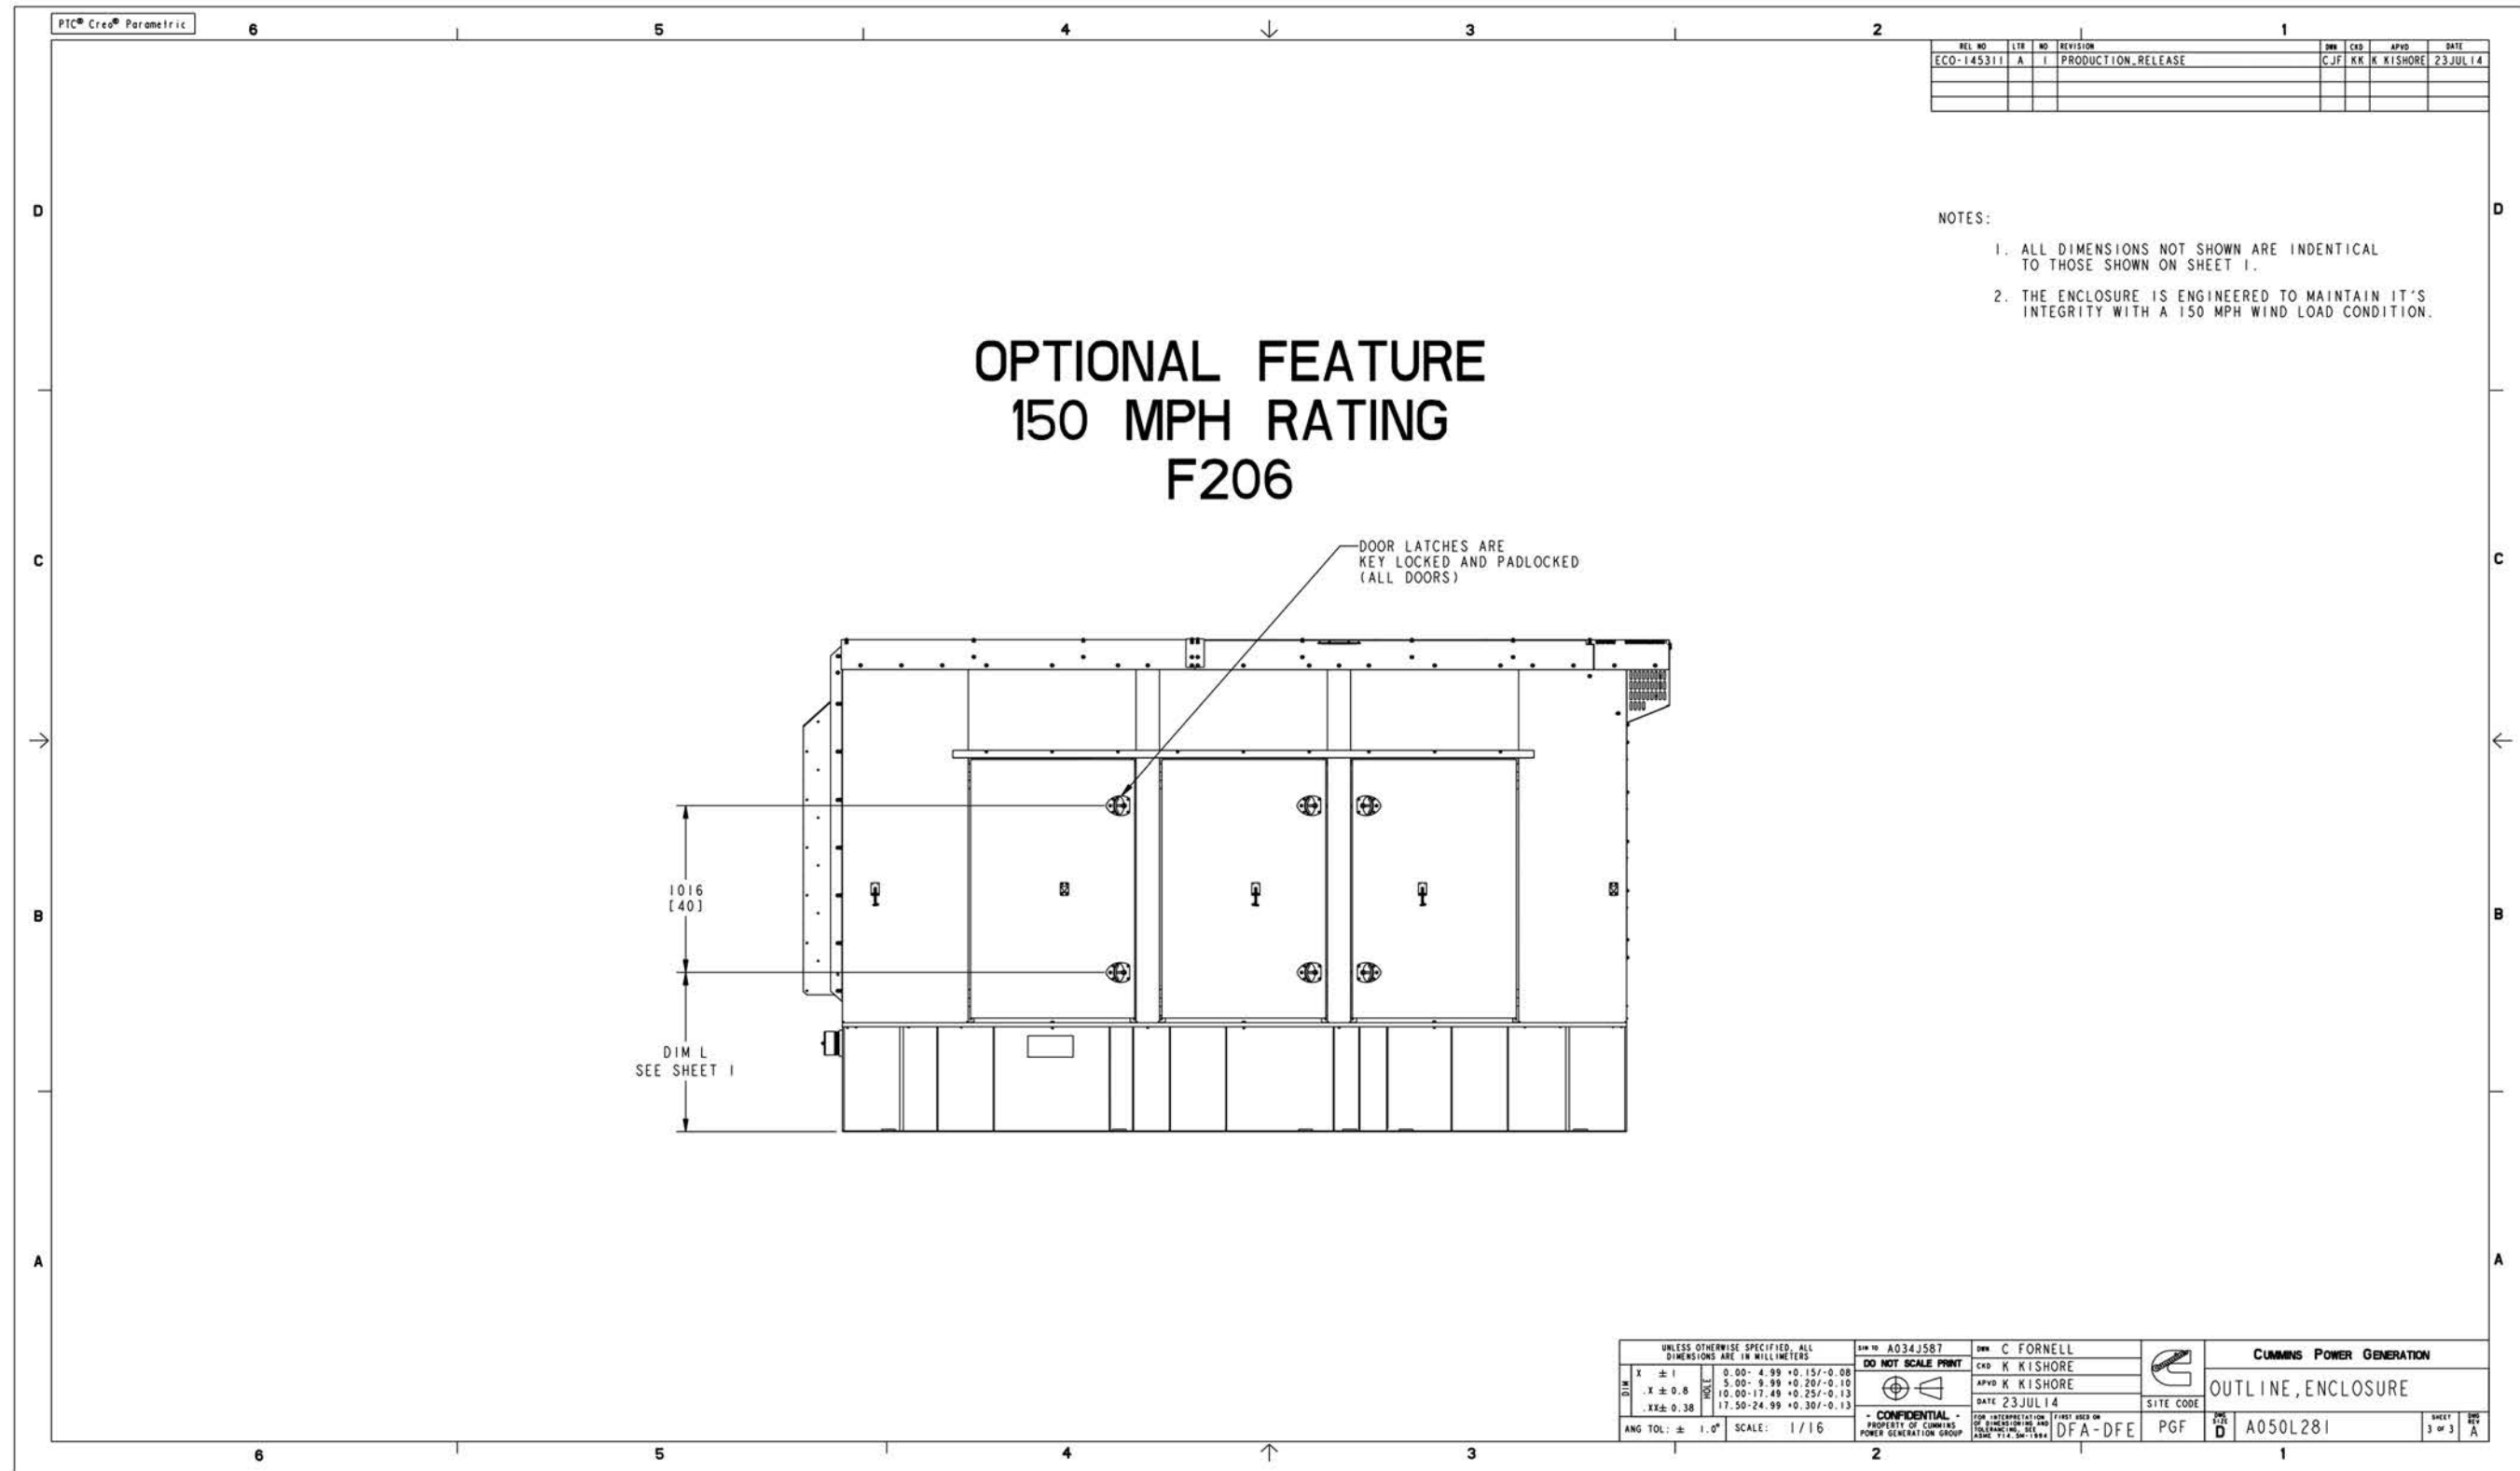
ENCLOSURE OUTLINE DRAWING SHEET 3 OF 3
